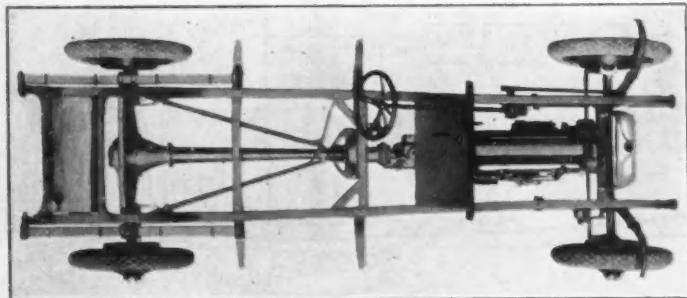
PLAN VIEW OF THE DUESENBERG CAR IN WHICH THE INTERNAL BRAKES ACT ON ALL FOUR WHEELS AND ARE ACTUATED HYDRAULICALLY
